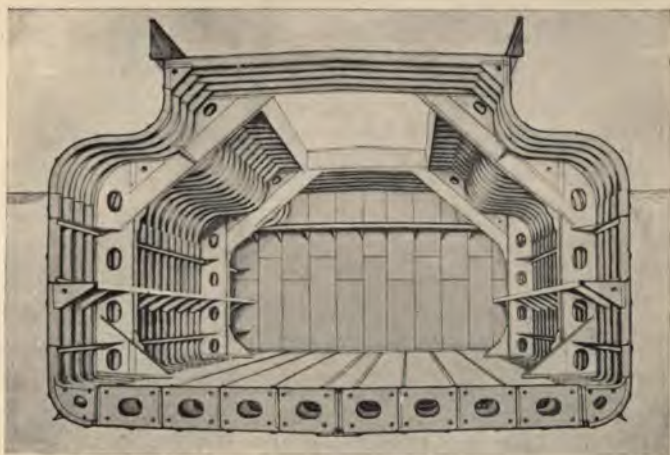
Cross section of a modern steamer of "Turret" type, constructed without beams or stanchions.
